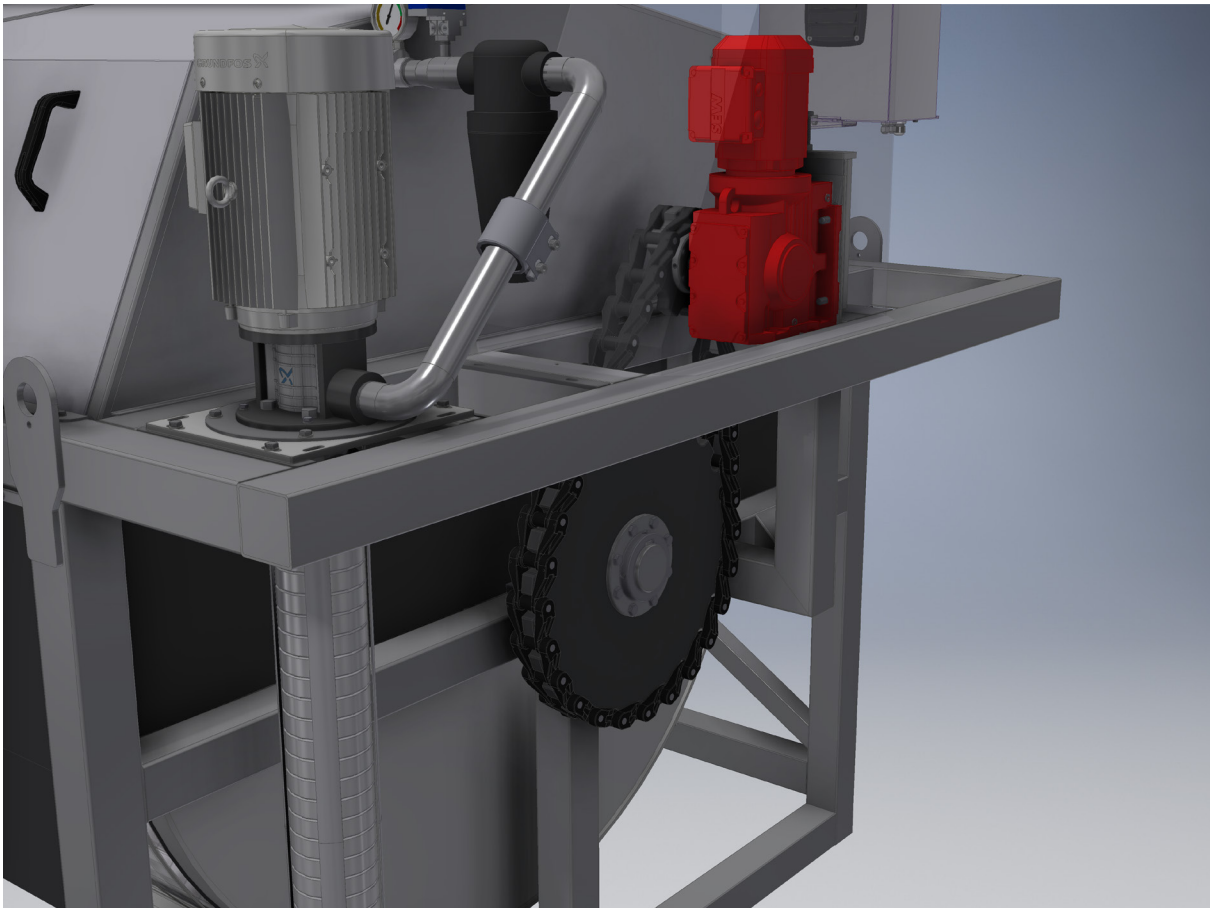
Drive assembly after upgrade, with HT78 plastic chain.
